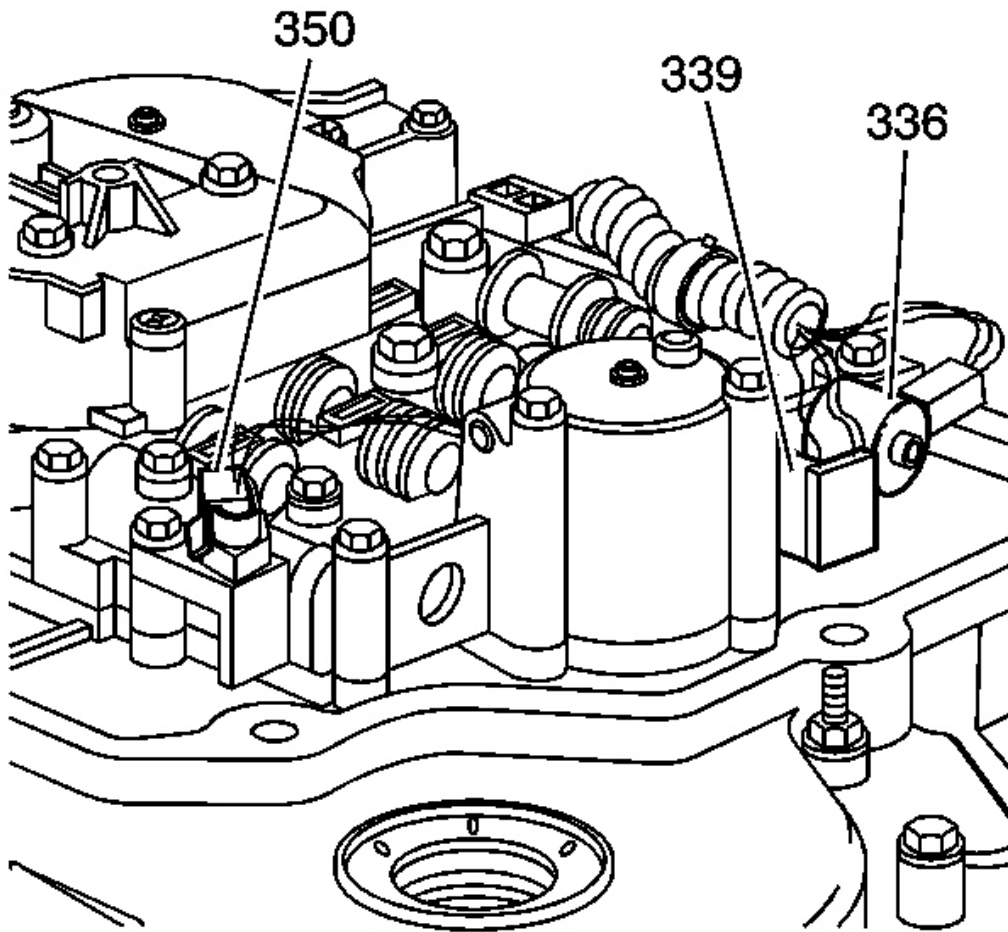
View Of Pressure Control Solenoid Valve, Torque Converter Clutch Solenoid Valve & Transmission Temperature Sensor Electrical Connectors
